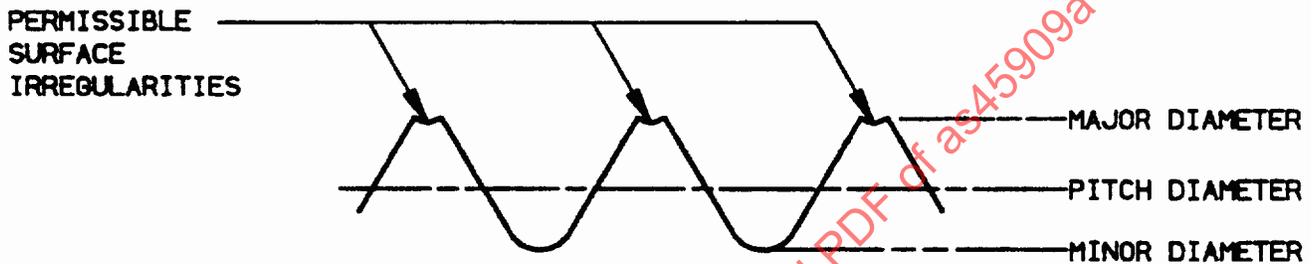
B - LAPS, SEAMS, AND SURFACE THREAD
